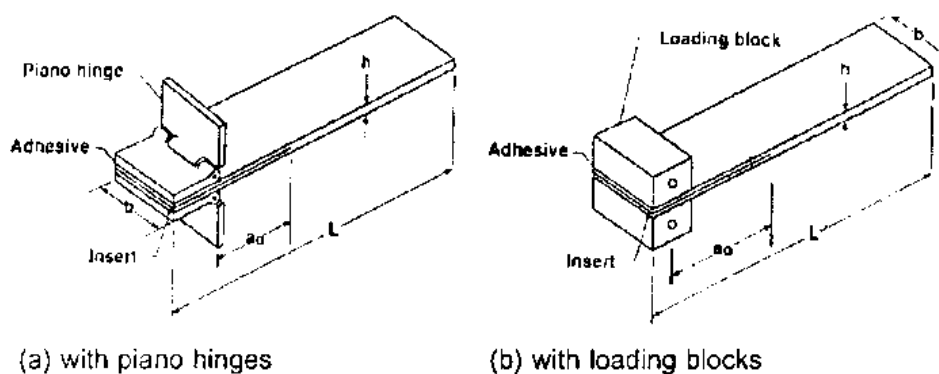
DCB specimens attachment method according to ASTM standard (ASTM 2001)
